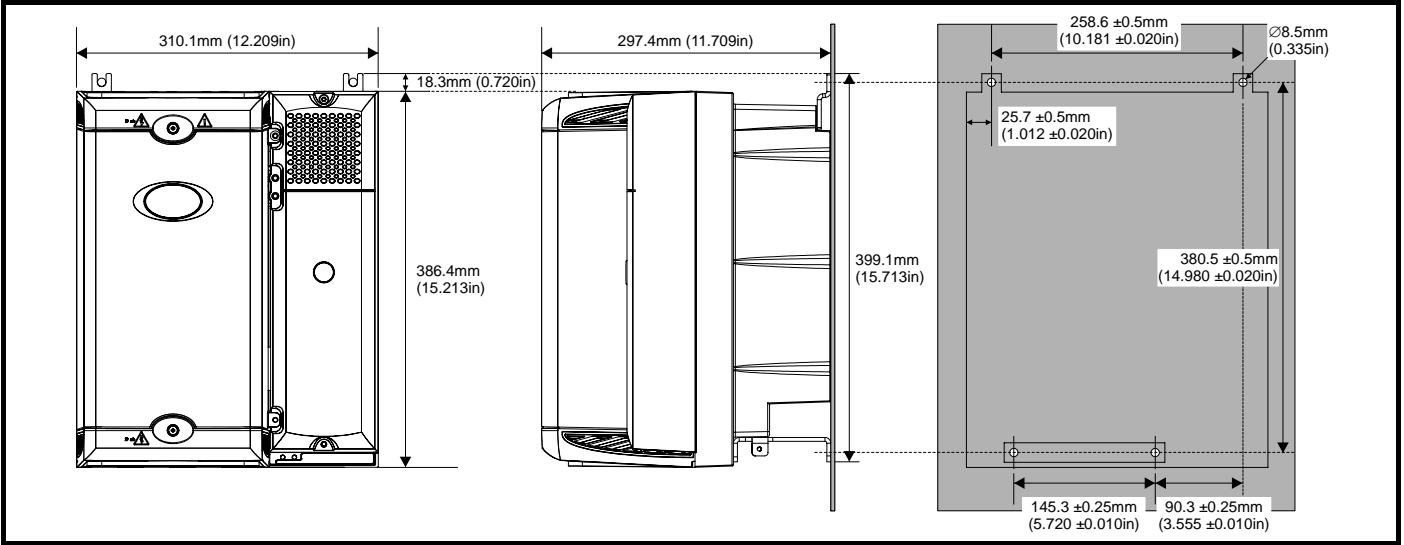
Through-panel mounting the Unidrive SPMC/U (rectifier)
